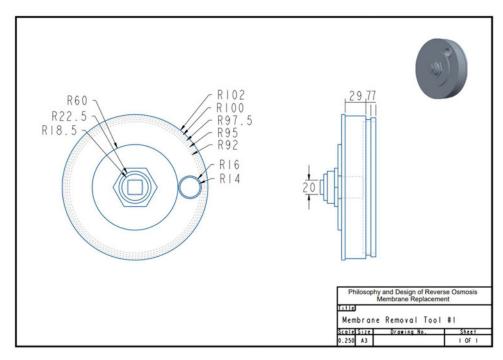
Engineering Drawing: Membrane Removal Tool #1
